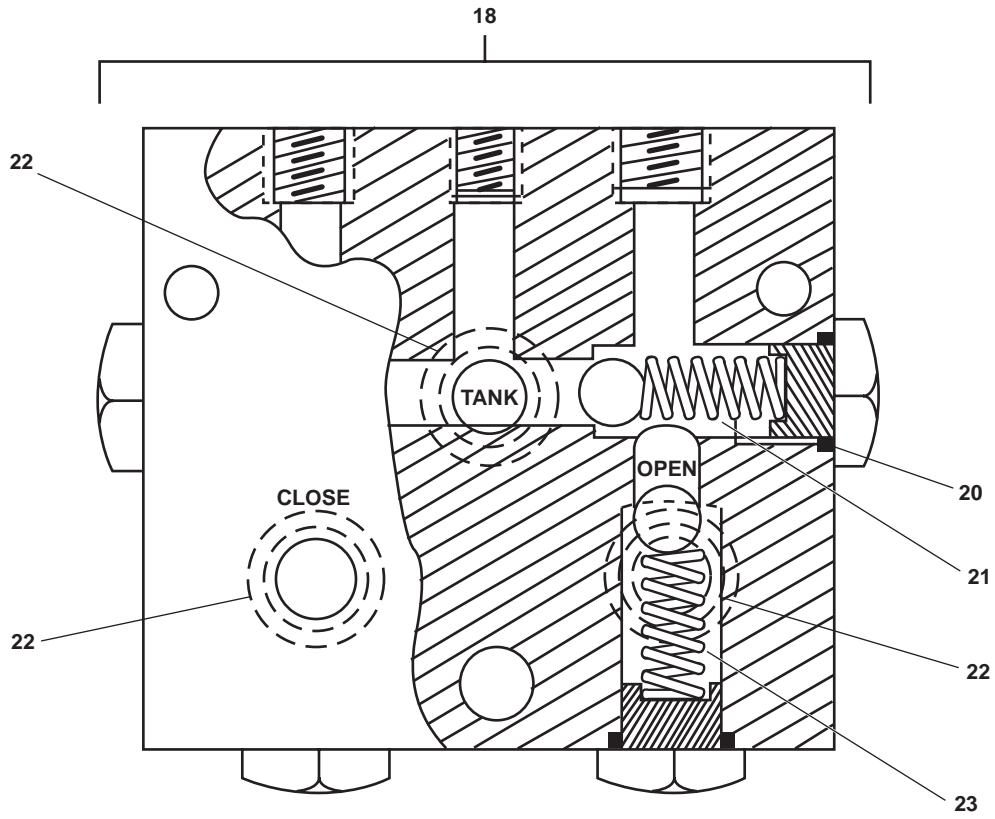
Hydraulic Watertight Doors (Sheet 5 of 9)
